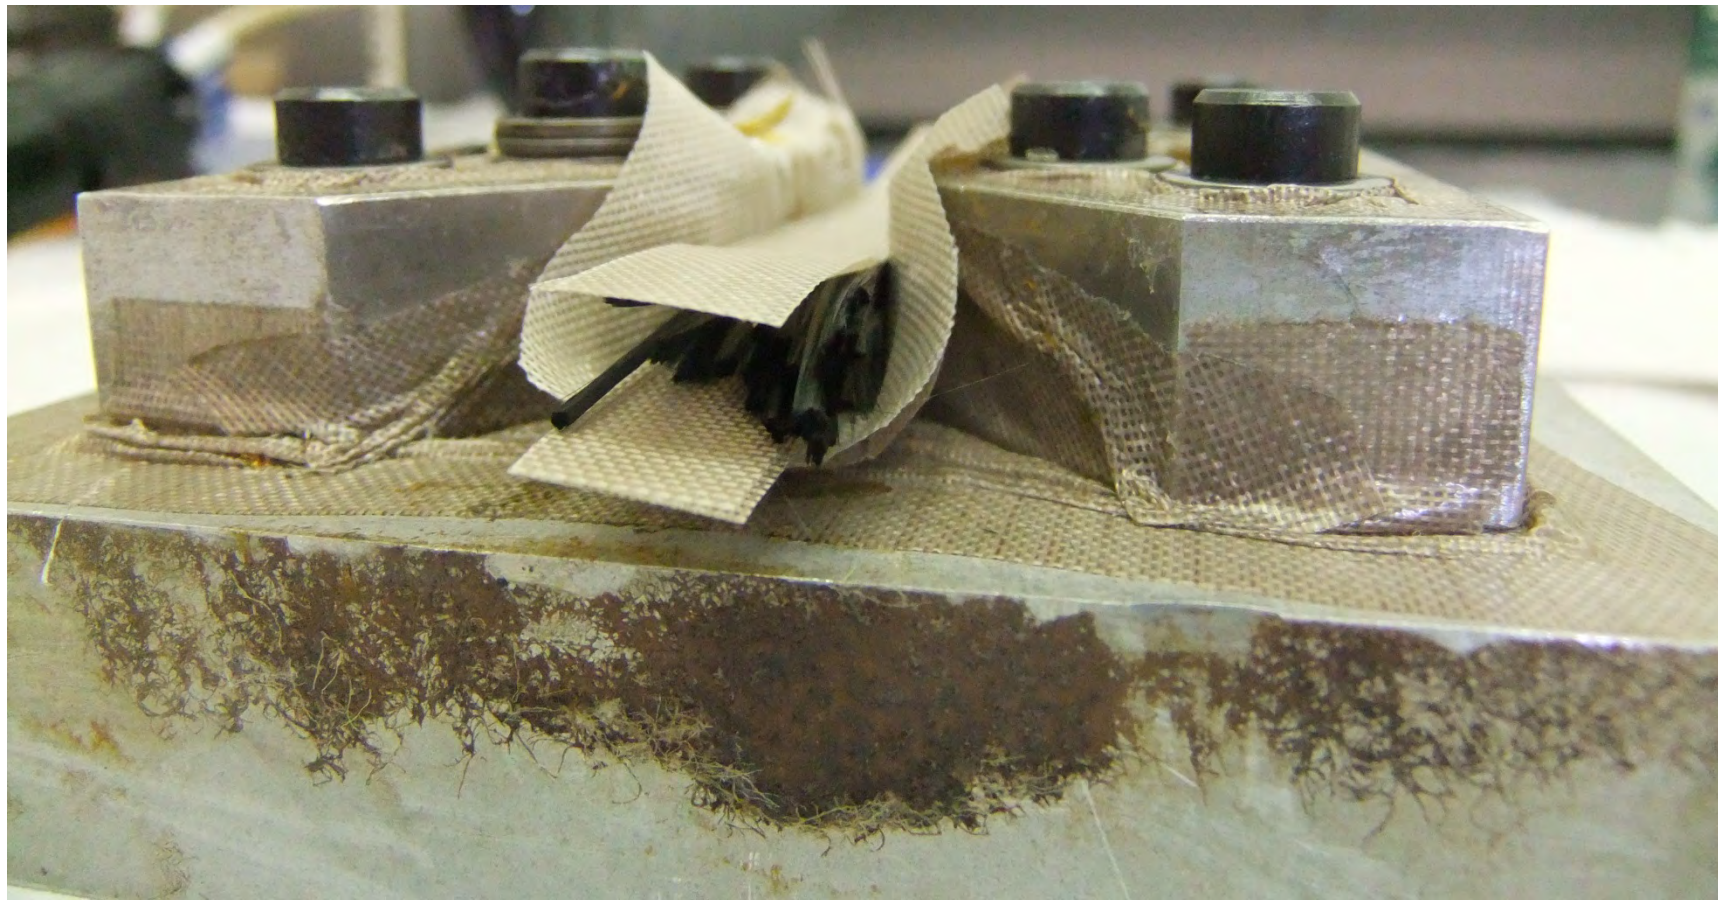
, Bottom Tooling Plate Bleed Plies Insertion Top Side View
